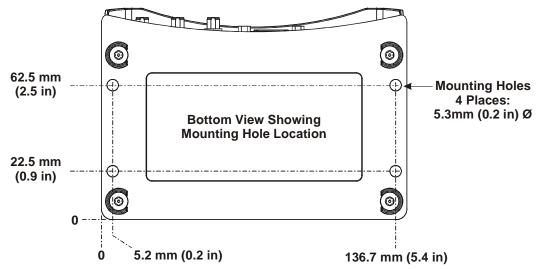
GX Series Bottom Plate and Mounting Holes
